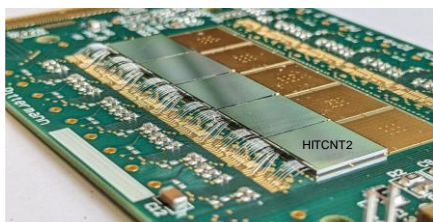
Five HITCNT2 chips bonded to multichip PCB
